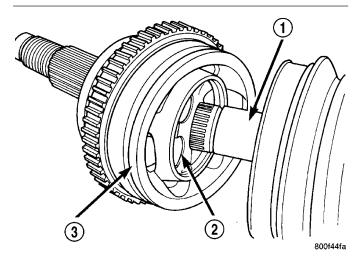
Outer C/V Joint Correctly Installed on Interconnecting Shaft
